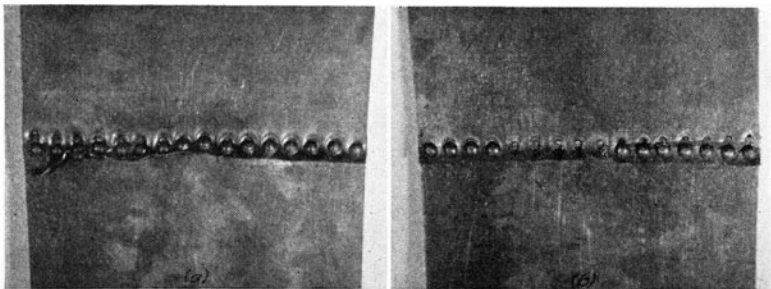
FAILURE BY SHEET TENSION, BY RIVET SHEAR, AND BY TEARING OUT OF RIVET TO THE EDGE OF OUTSIDE SHEET, SPECIMEN AD-3C
